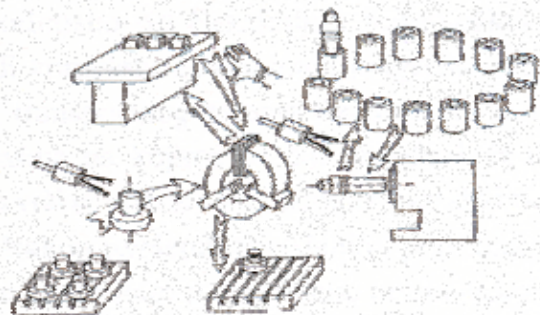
Principle scheme of fixture handling in frame of flexible manufacturing module
